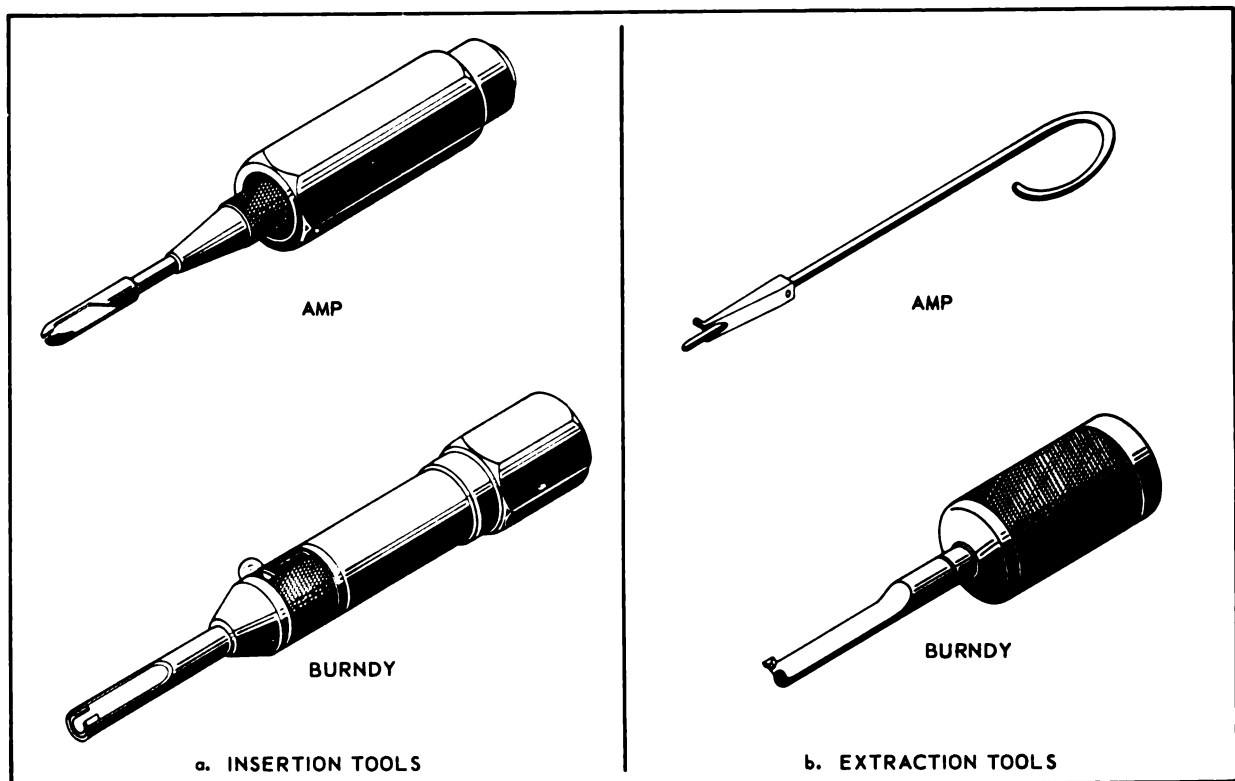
Insertion and Extraction Tools for Taper Pins
